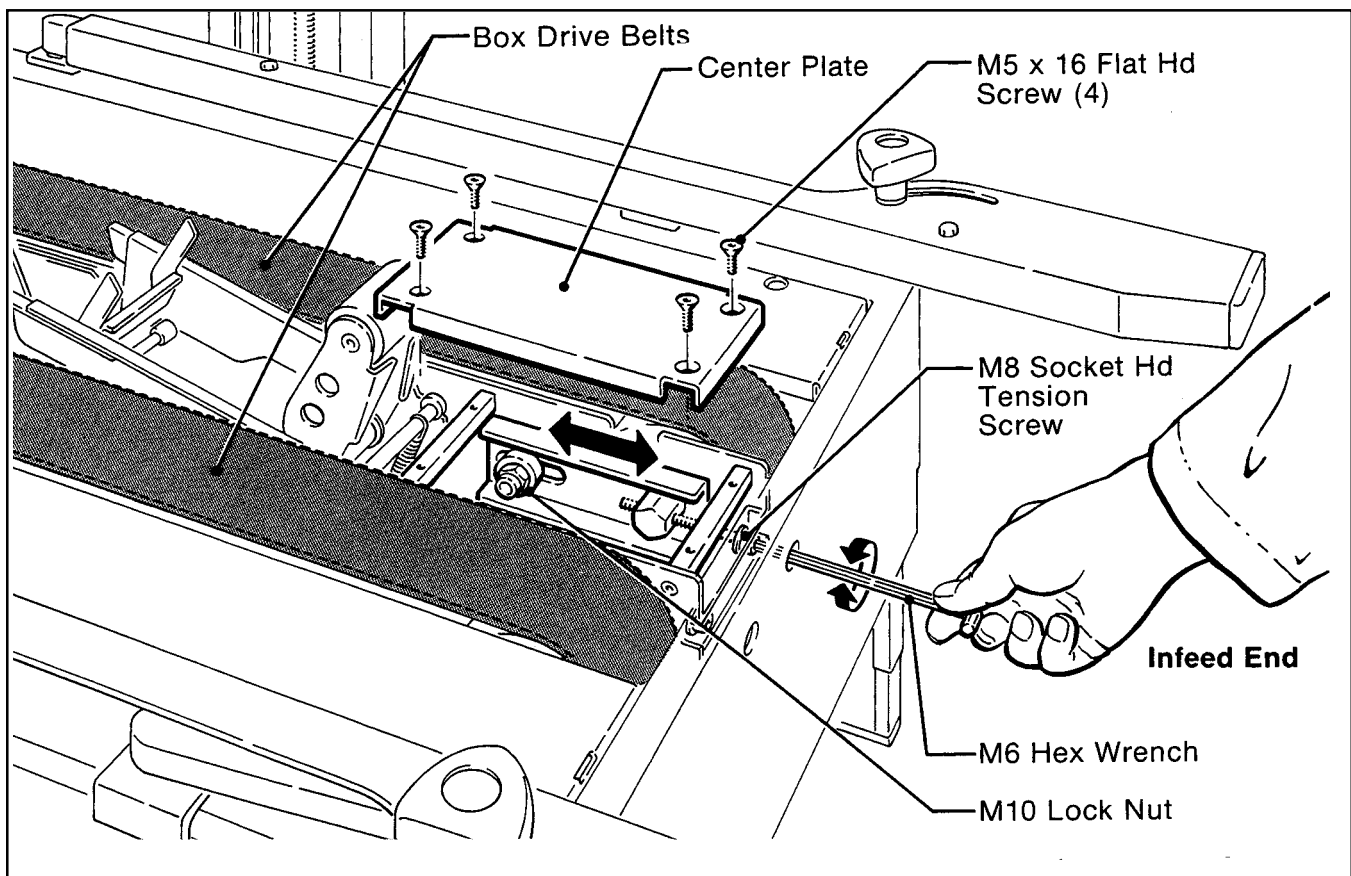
Box Drive Belt Tension Adjustment, Lower Belts (Infeed End)
